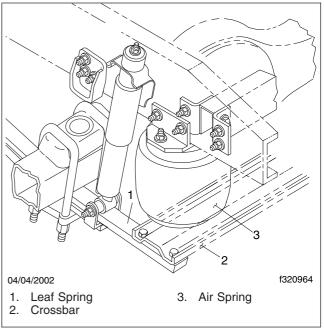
, Leaf Spring and Air Spring Assembly (23,000and 46,000-pound suspensions)
